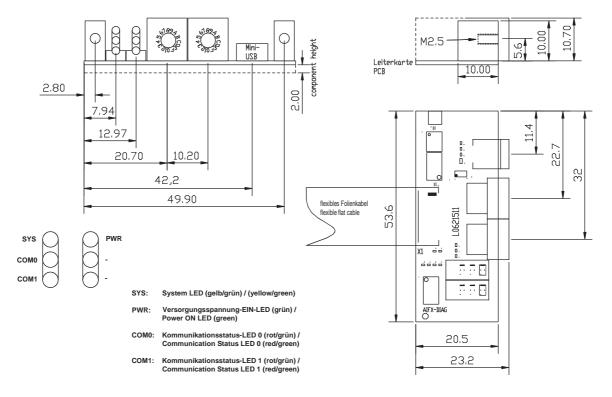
Dimensioning and LED Display Diagnostic Assembly Interface (AIFX-DIAG)
